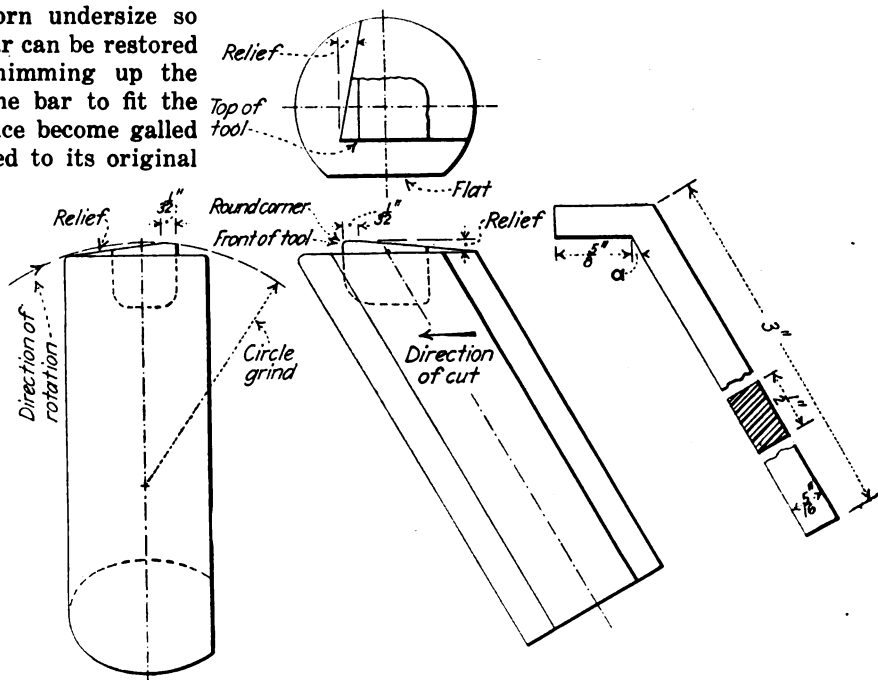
DETAILS OF SHANK WITH DIAMOND FASTENED TO IT AND GAGE FOR CHECKING RELIEF AND ANGLE
